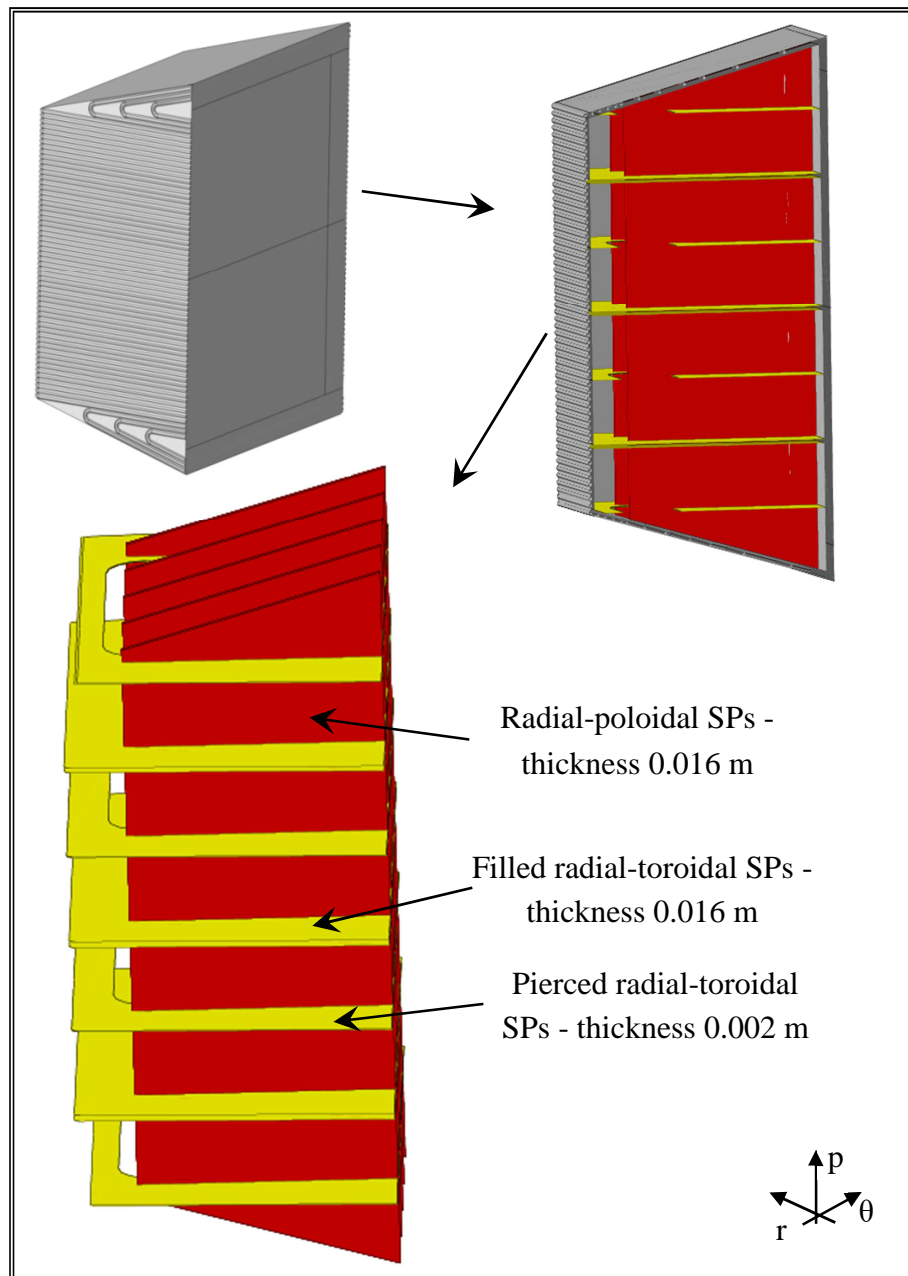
Configuration 1 - 3D geometric model exploded view.
